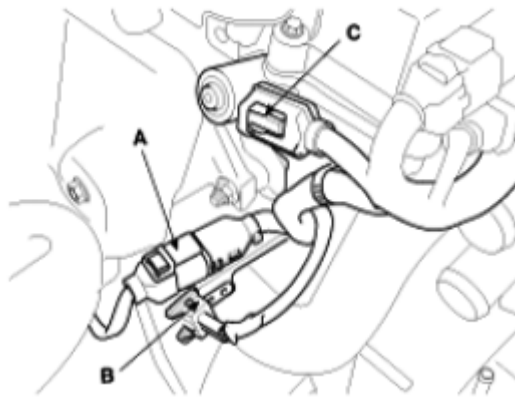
Identifying Front Oxygen Sensor Connector And CKP (Crankshaft Position Sensor) Connector
